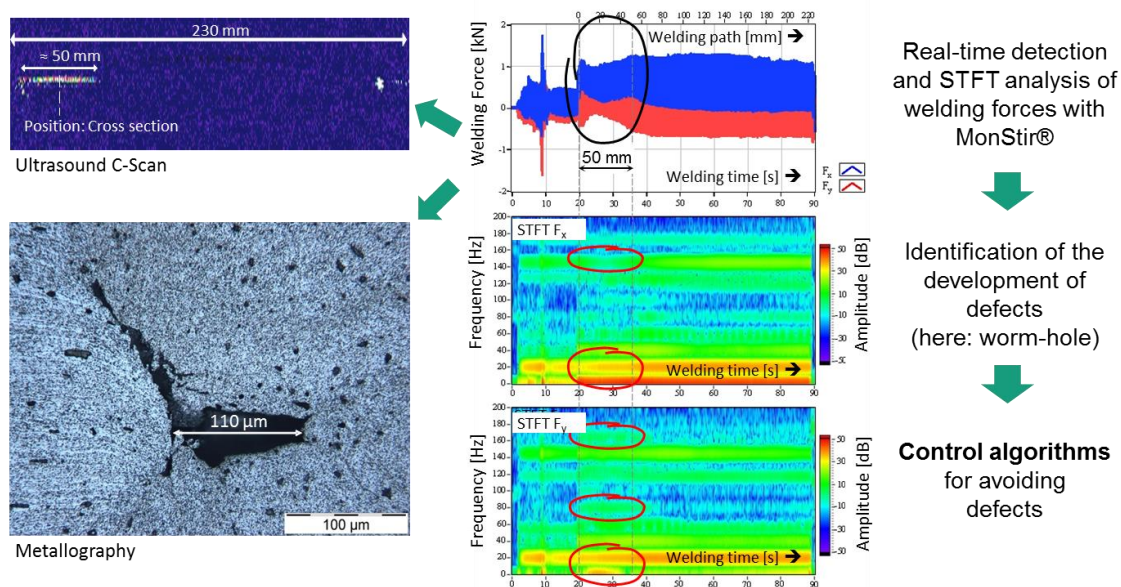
Schematic illustration of the MonStir® concept for process monitoring and control of the Friction Stir Welding process [13].
